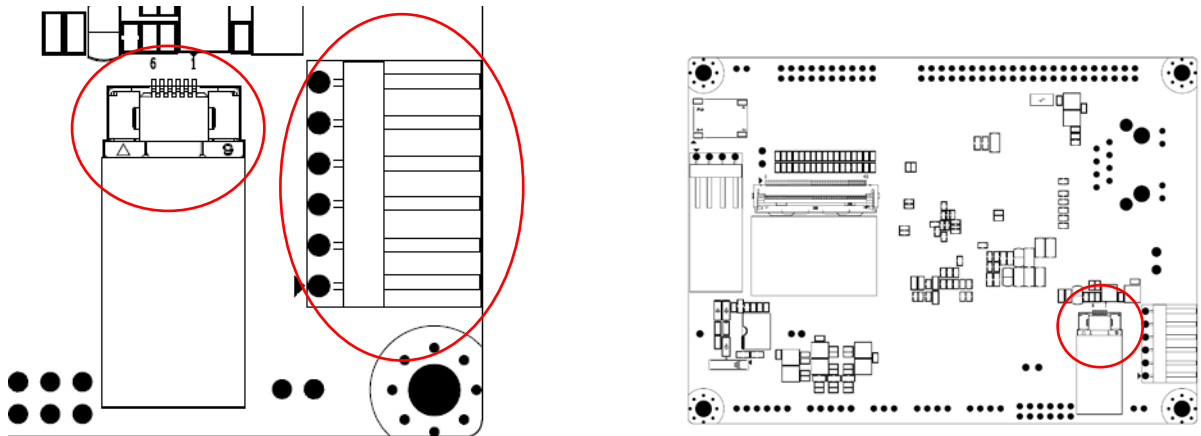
The 6-pin ZIF socket for the FPC cable of the PCAP Touch Panel
